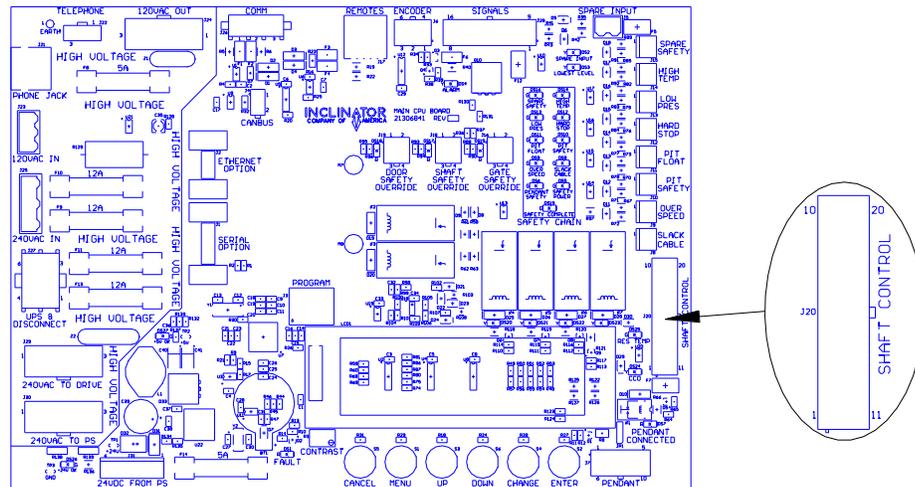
CPU Board, Motor Control Enclosure Signal Cable Connections
